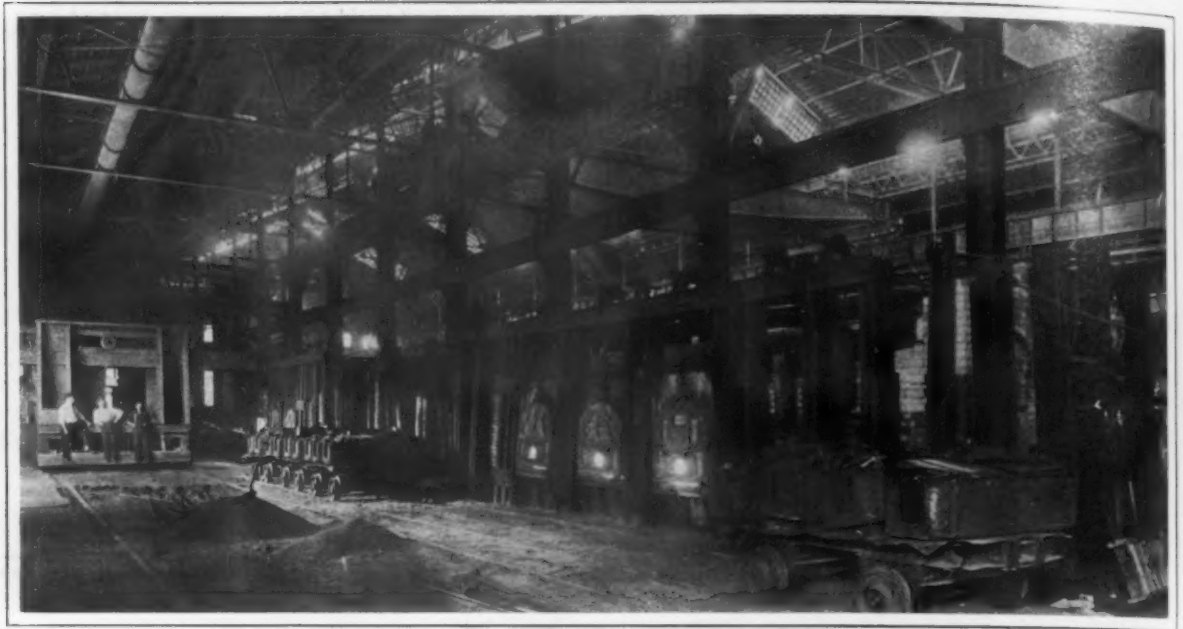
The Melting Furnaces Are On the Level of the General Foundry Floor
